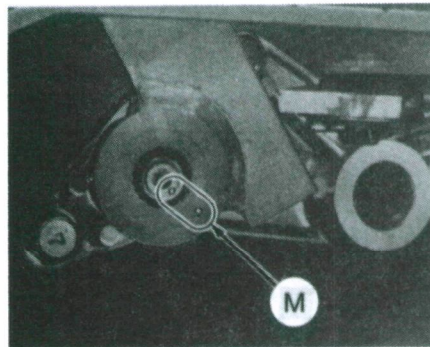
Match marks (M) on pitman arm and sector gear shaft must be aligned.
